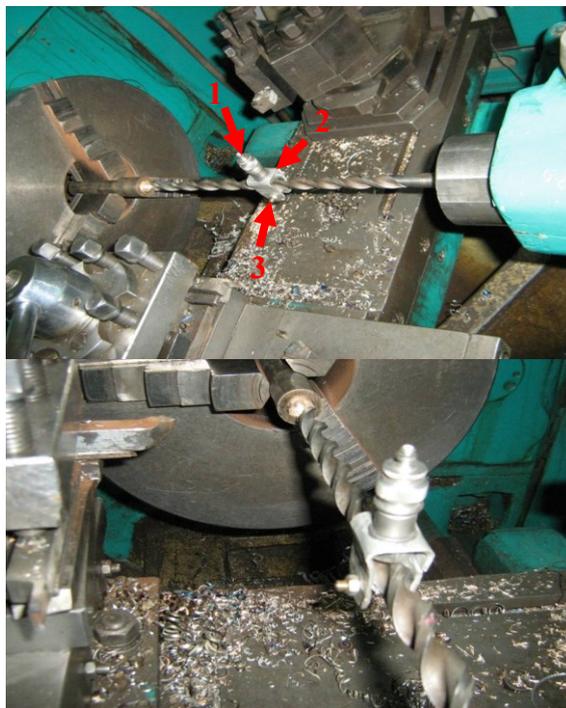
A special removable assembly used to connect the accelerometer on the tool
